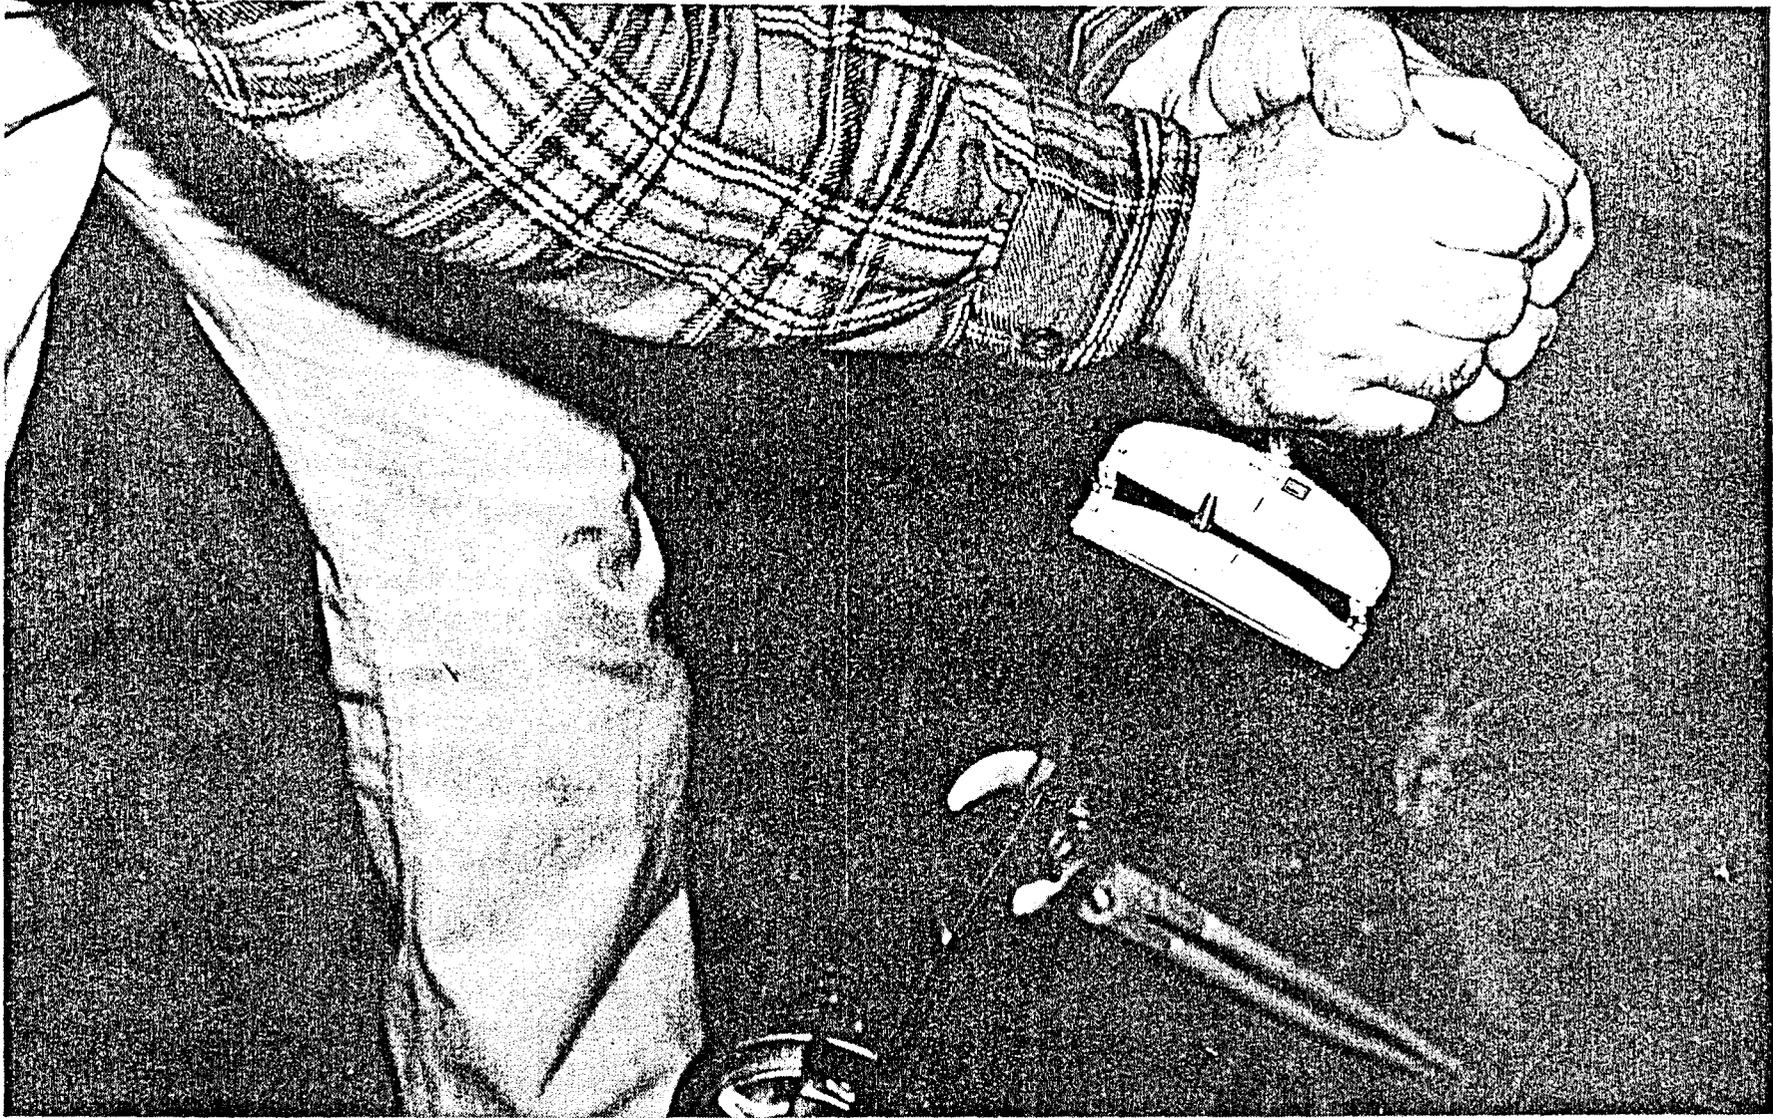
CLTD Manufacture, Torque Testing Close-up.
